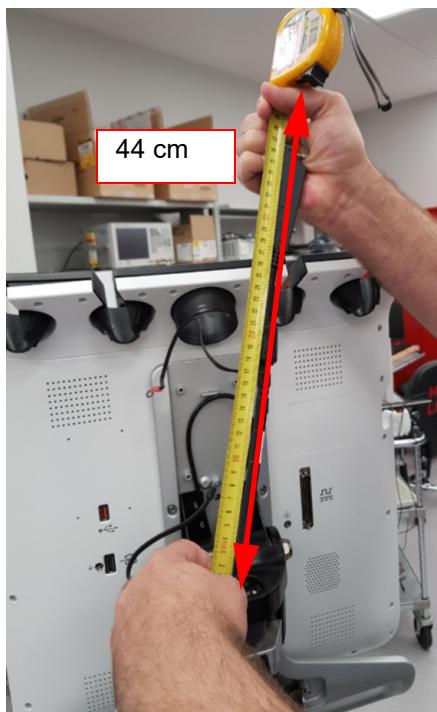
Routing MPB to Cockpit Cable - Measuring 44 cm
